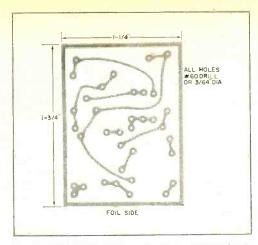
Printed circuit board is shown actual size to help you make your own. However, almost any suitable chassis or breadboard arrangement can be used.
